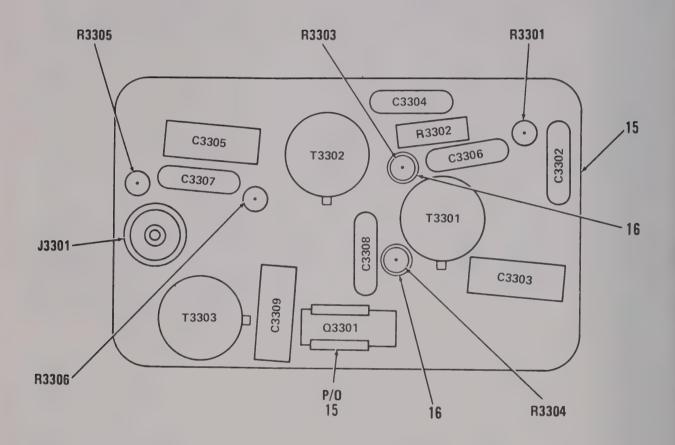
Control Assembly, Front Panel (Sheet 2 of 2).
